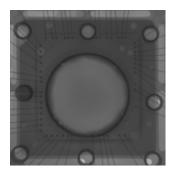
X-Ray of Moderate E-Pad Solder Connection
